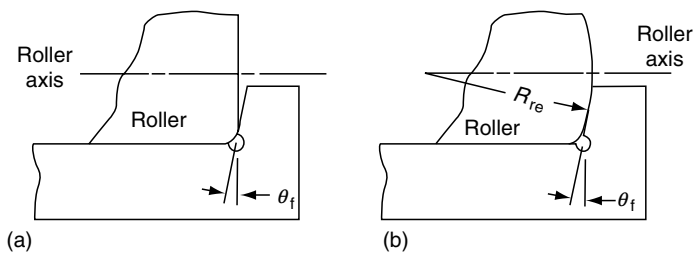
Cylindrical roller bearing, roller end-flange contact geometry. (a) Flat end roller. (b) Sphere end roller.
